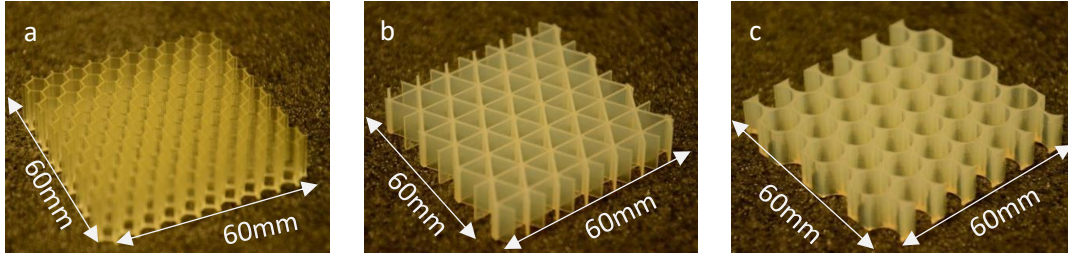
3D Printed honeycomb specimens: (a) hexagonal honeycomb, (b) triangular honeycomb and (c) circular honeycomb
